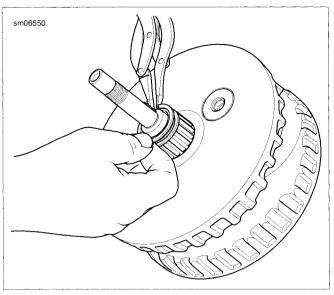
Installing Pinion Shaft Bearing and Retaining Ring
